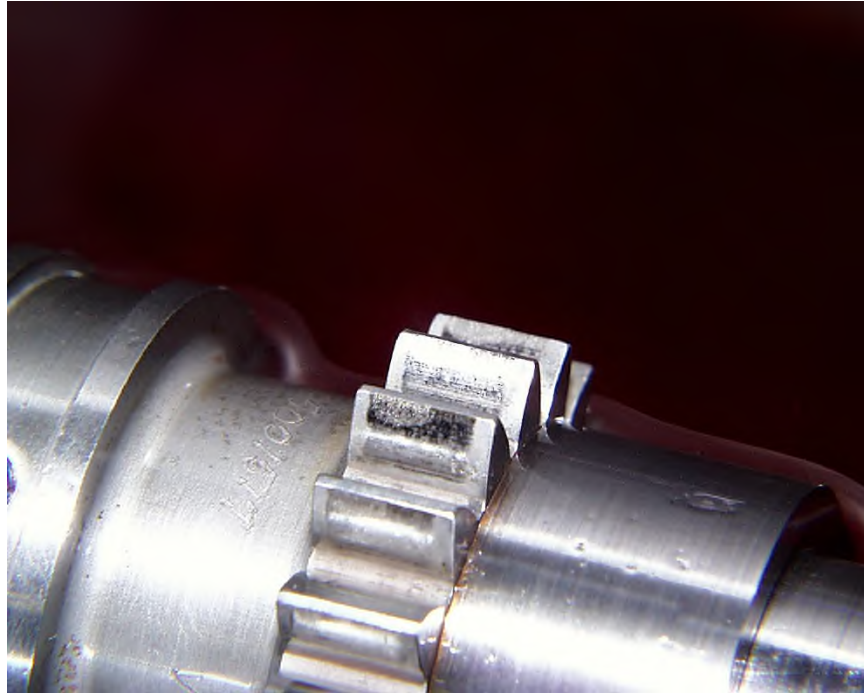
Wear marks on driven side of pinion gear teeth after Back-3c.
